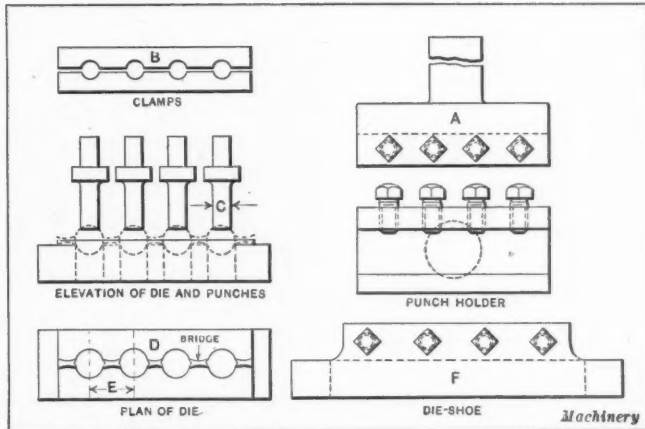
Type of Die used for shearing String Forgings into Individual Ball Blanks
